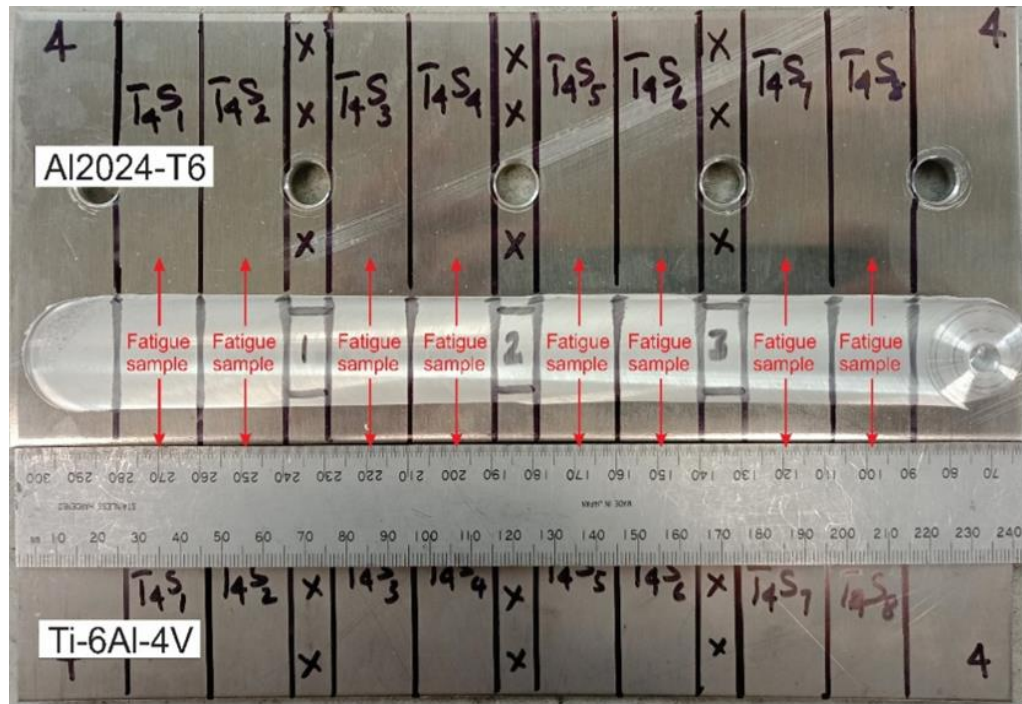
Illustration of a welded plate pre-marked with fatigue samples to be sectioned off for fatigue testing.
